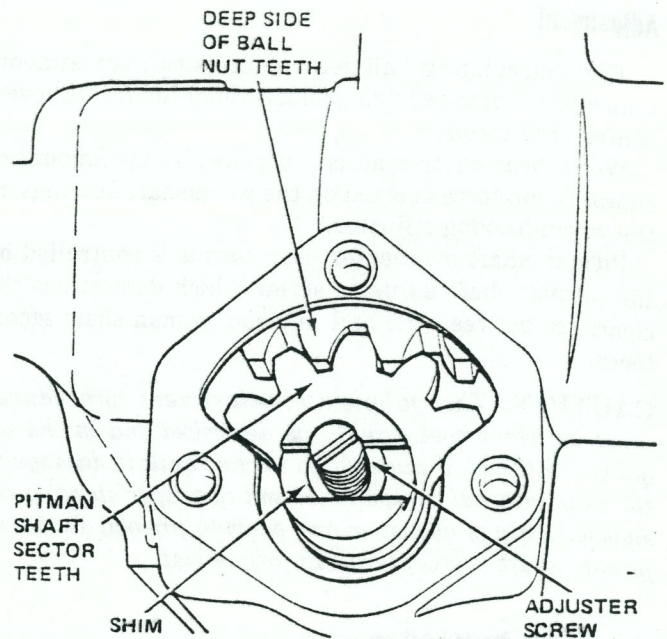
K-15 Pitman Shaft and Ball Nut in Centered Position
